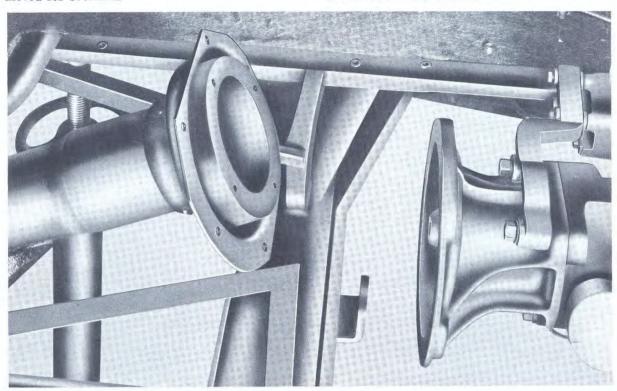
Removing Rear Axle—Floor Pan Removed.
